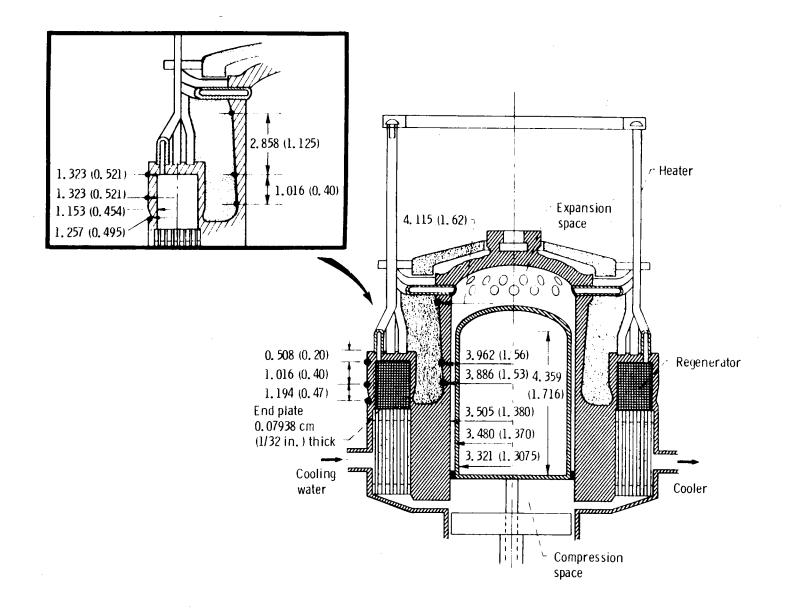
GPU-3 Dimensions for Heat Conduction
